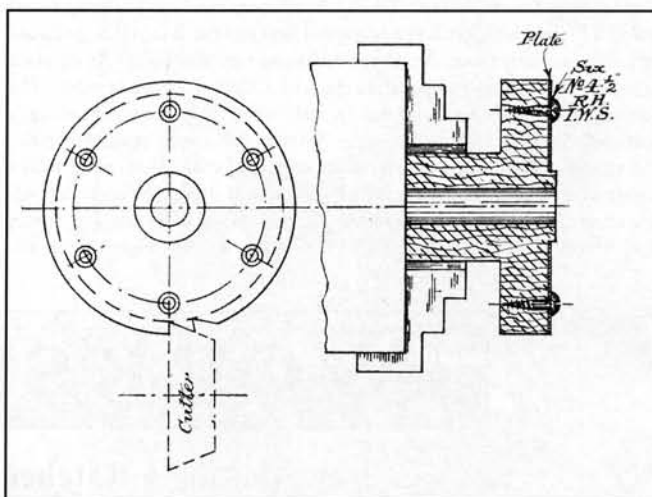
Detail of Hardwood chuck for holding wheel blank.
